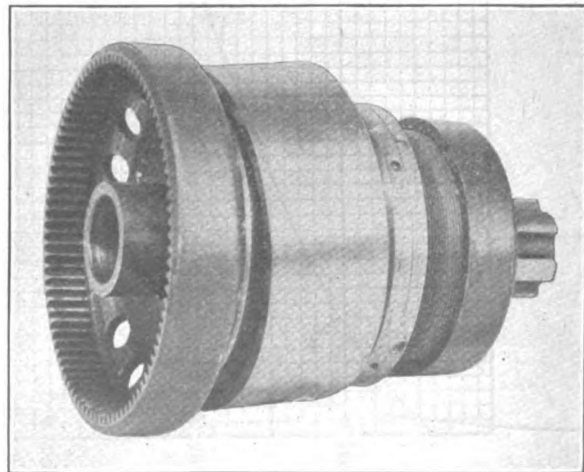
Bijur (rear end) starter driving barrel assembly, showing internal gear.
